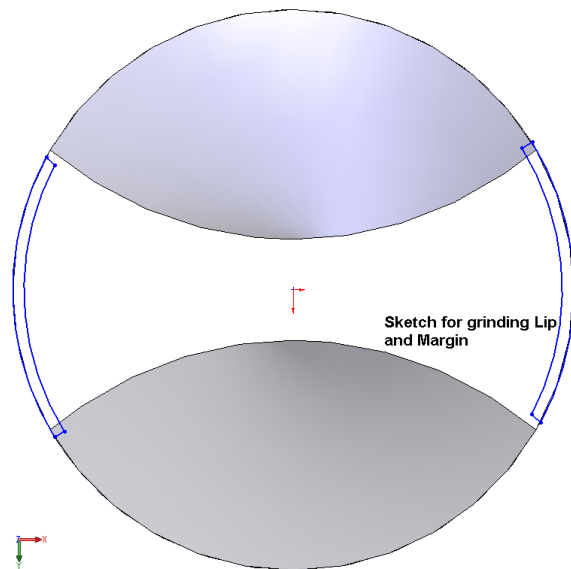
Drawing the Cross-section of the Margin and Lip Relief Cut
